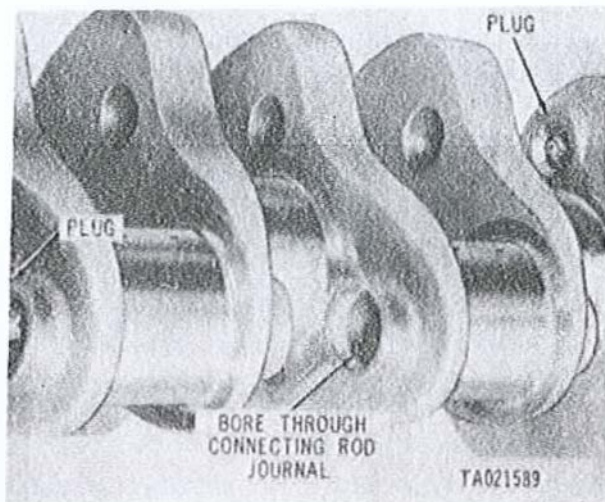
Removing or installing crankshaft oil retaining plugs.
